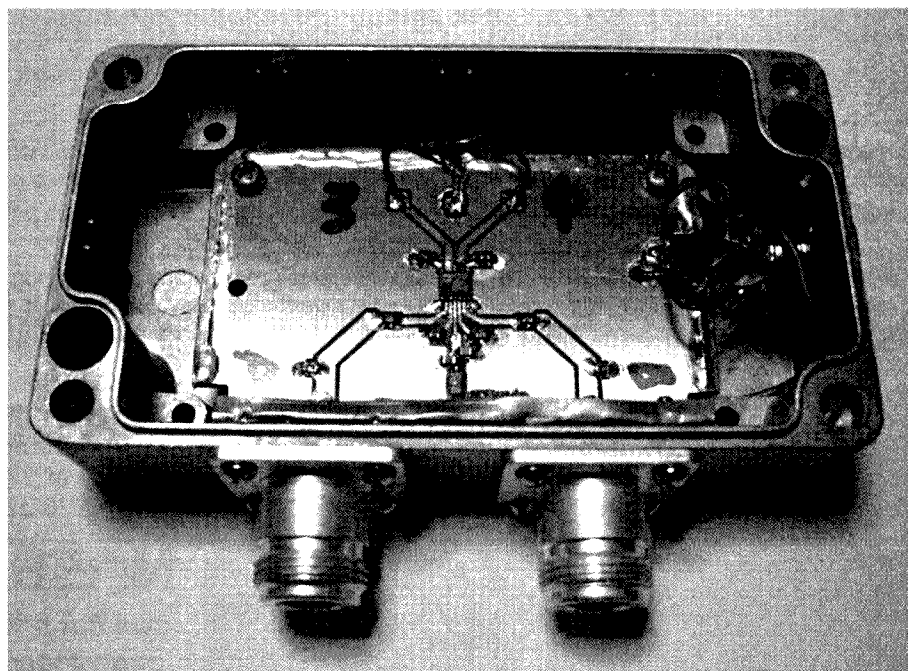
The AD8302 module. The Analog Devices data sheet should be consulted when using the AD8302 as circuit board layout is important for best performance of the device. Double sided circuit board was used, and small 0805 and 0603 surface mount components were used.
